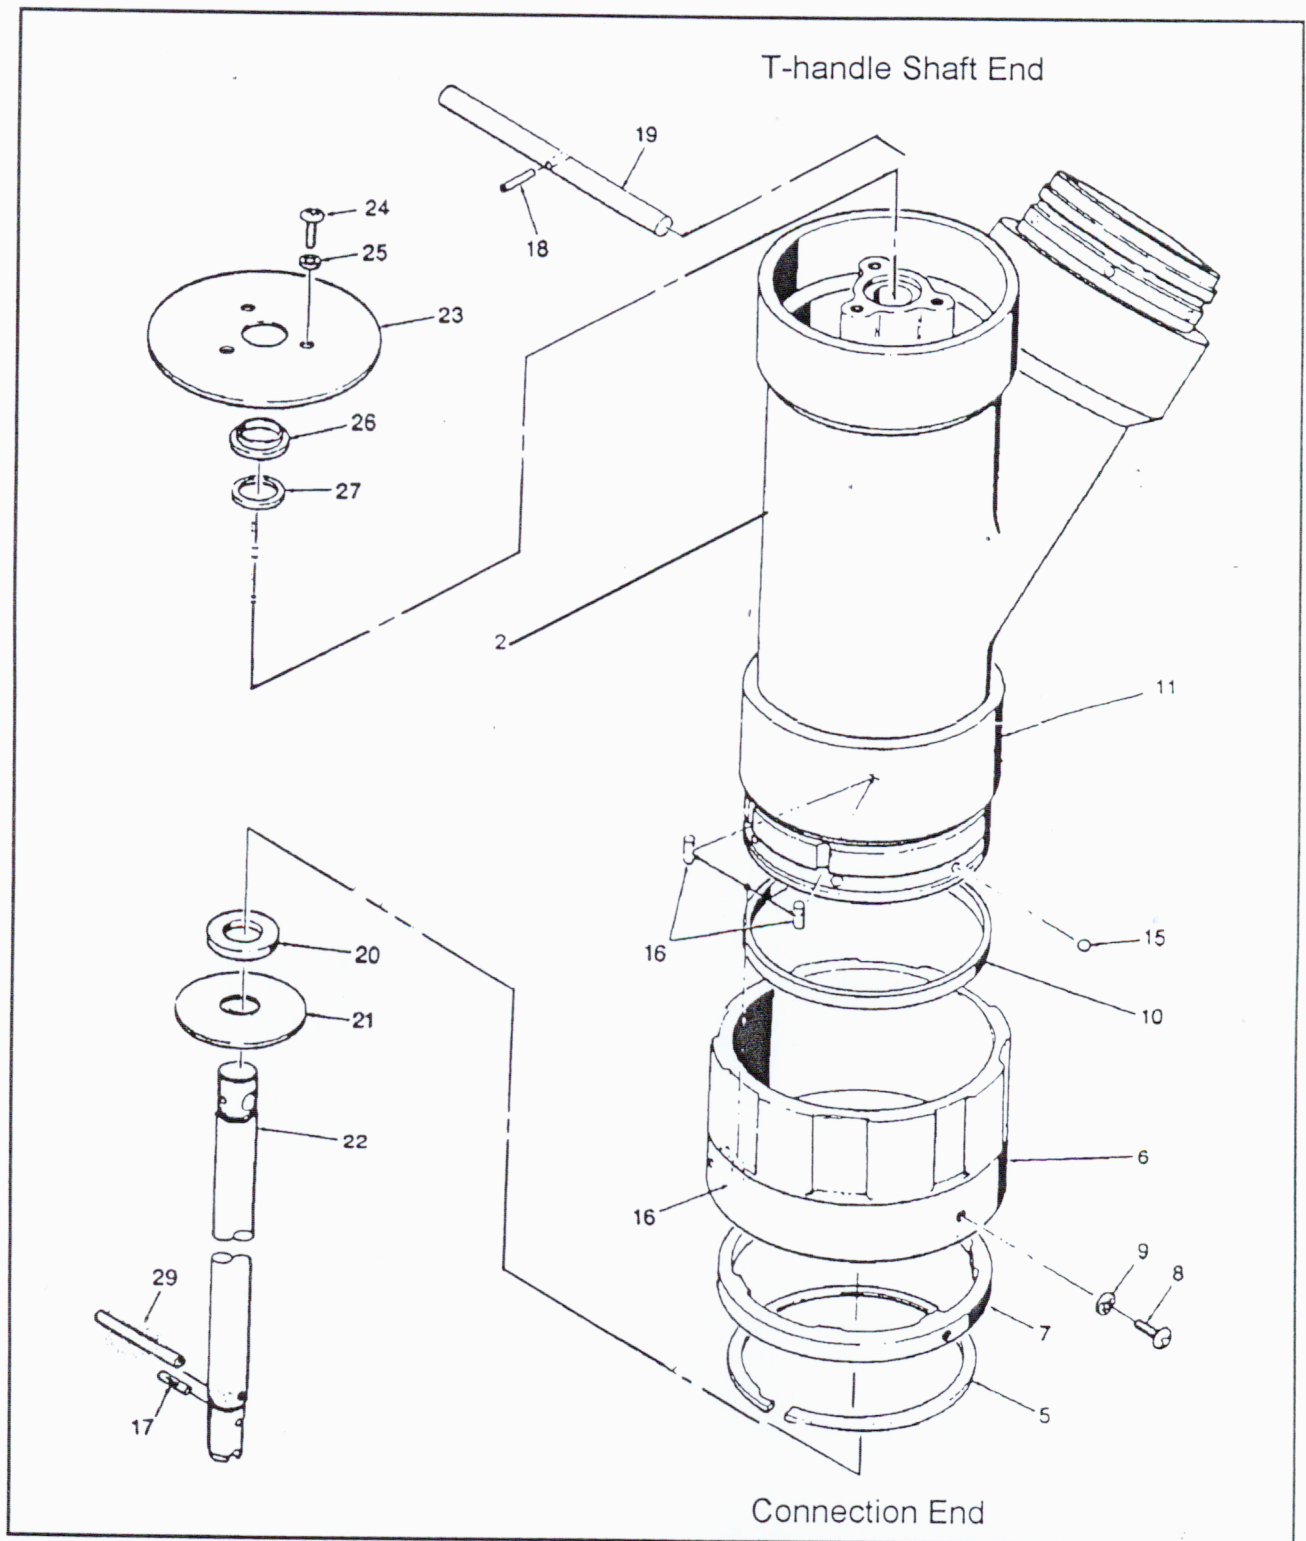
DRAIN COUPLING ASSEMBLY, EXPLODED VIEW
